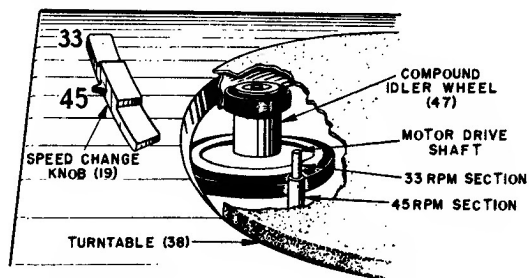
Compound Idler Wheel and Motor Drive Shaft.
